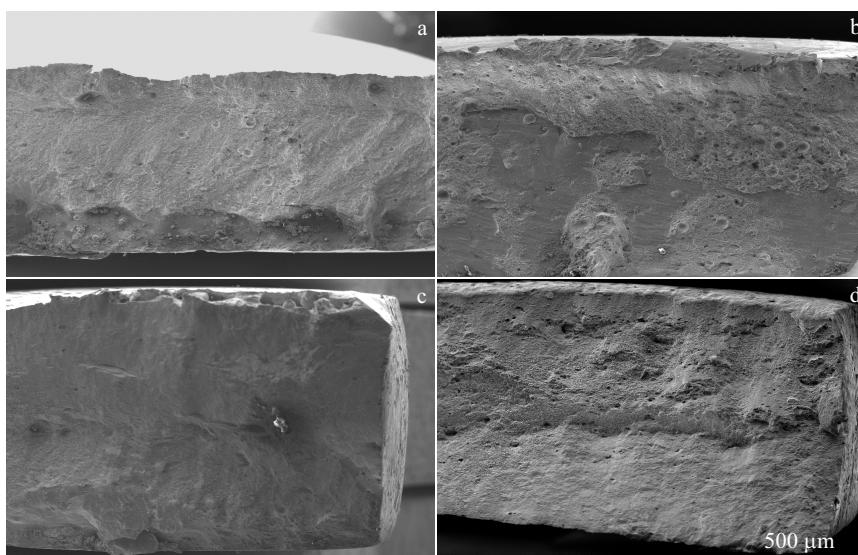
Fracture surfaces of laser repaired Inconel718 superalloy samples deposited with different magnetic field currents: (a) 0 A, (b) 20 A, (c) 40 A, and (d) 60 A
